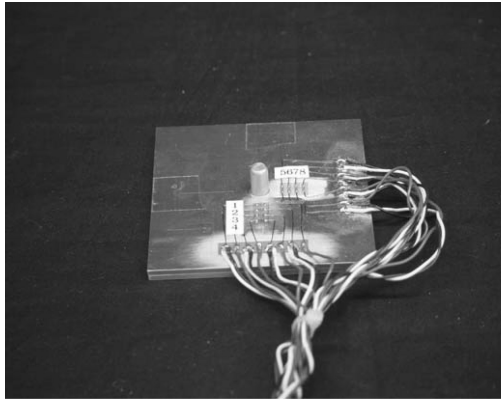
Microstrain gauge arrangement on inner sheet surface before riveting.
